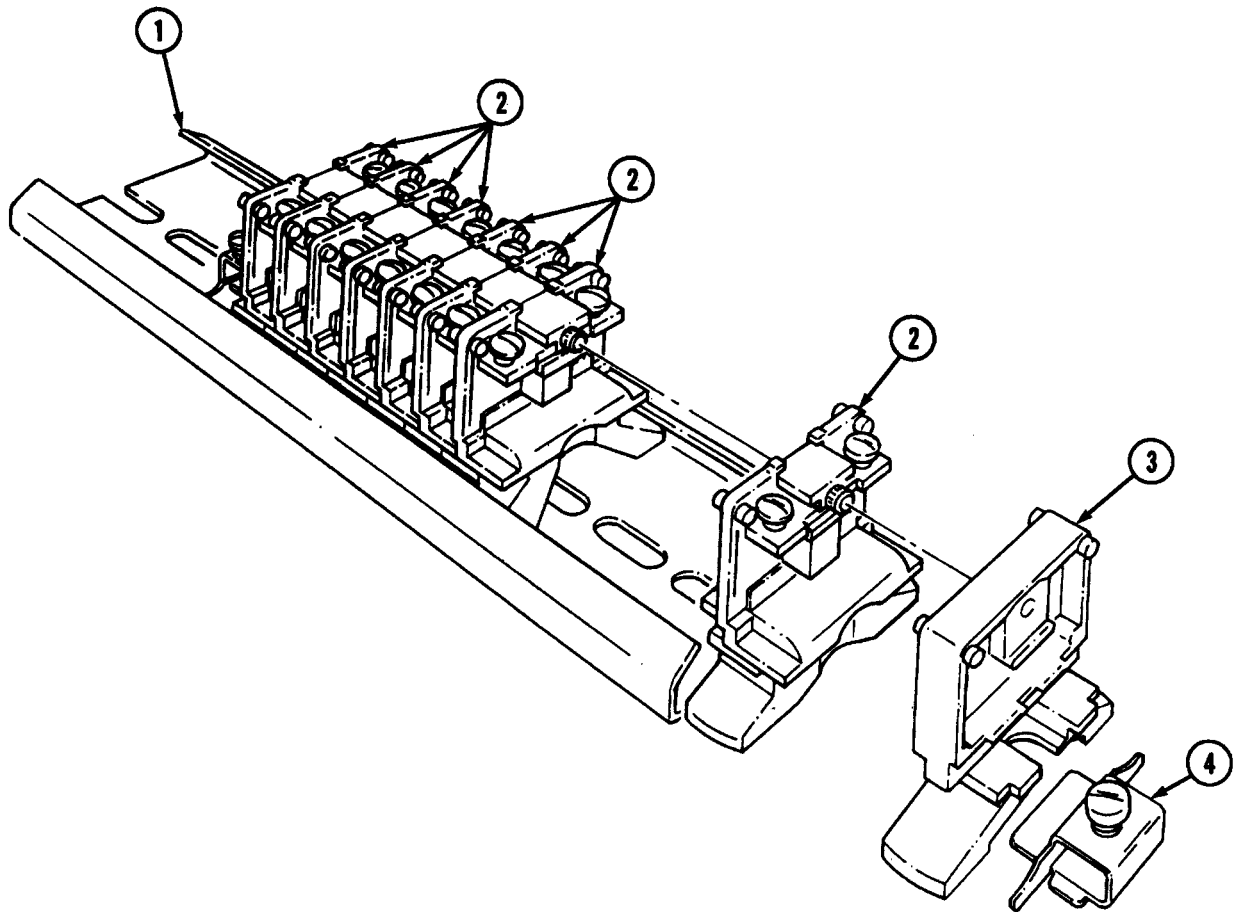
Channel, 6.00-in. and Terminal Block Assembly.
